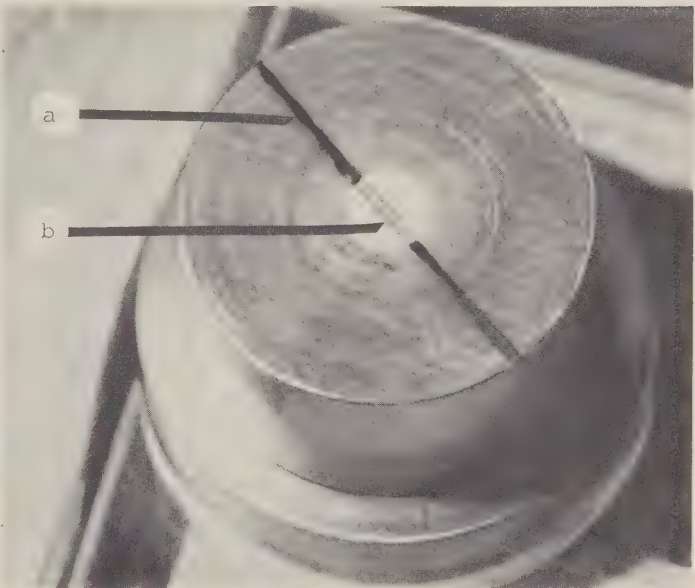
Finished horizontal tensile test specimen. A, line of mould. B, line on specimen placed with felt pen.
